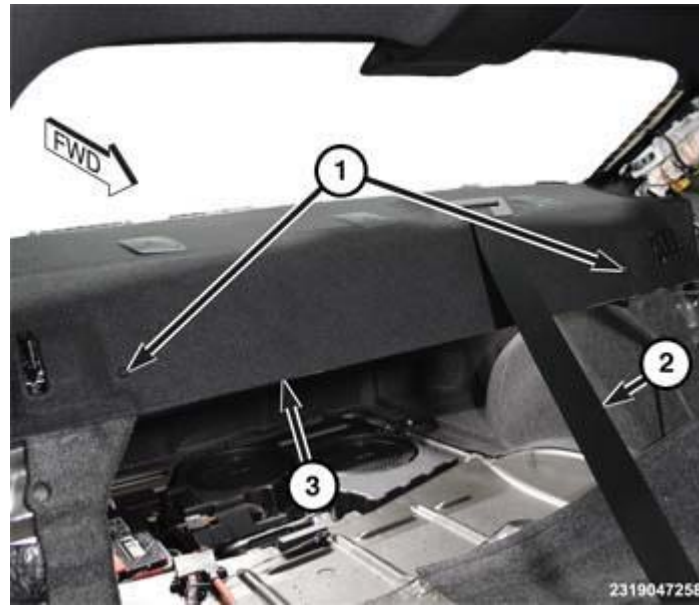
Push Fasteners, Rear Seat Belt & Rear Shelf Trim
